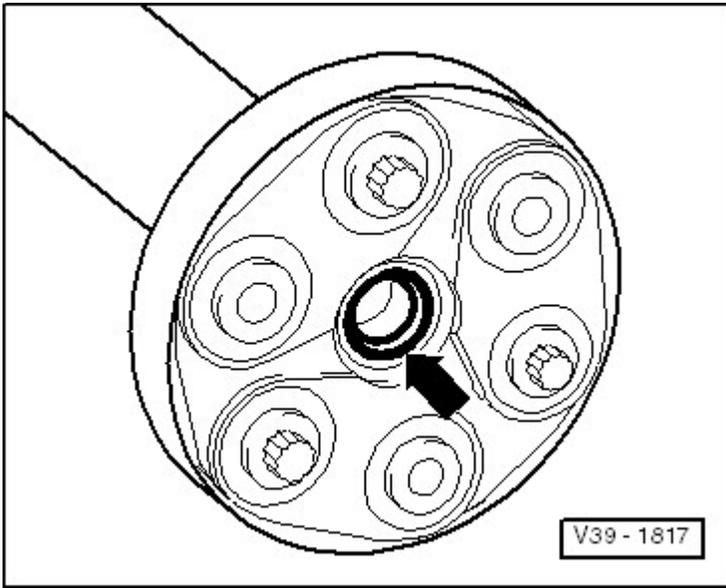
Identifying Sealing Ring In Driveshaft Flange
